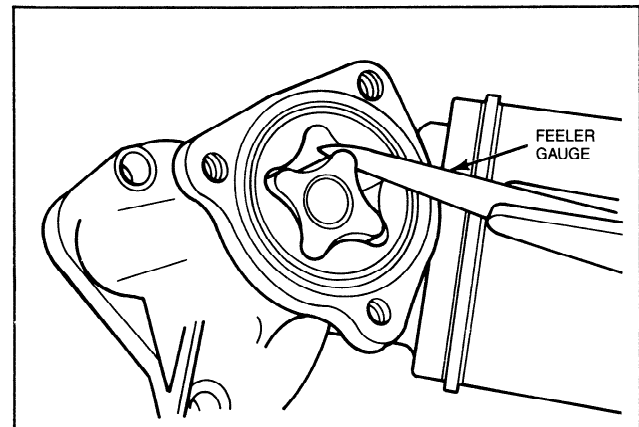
Checking Rotor Lobes to Outer Race Clearance
